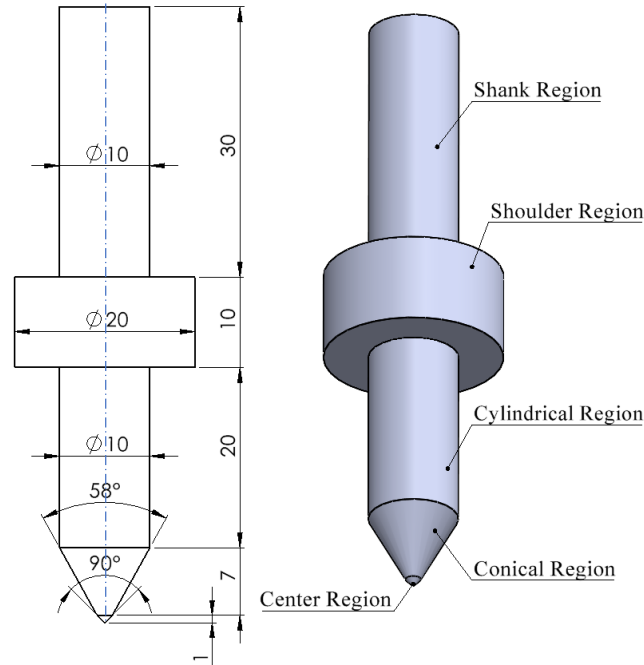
Schematic drawing representing the geometry and regions of the thermal drilling tool.
